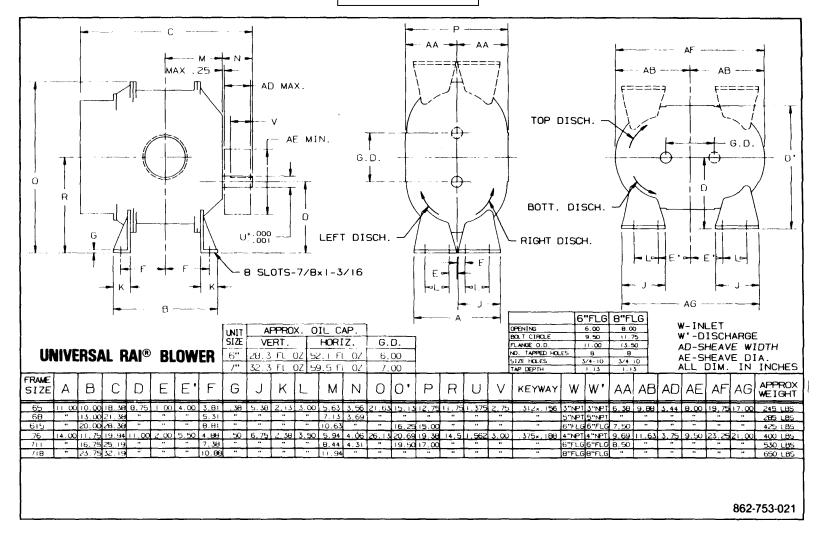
Dimensional Assembly of UNIVERSAL RAI® Blower (6" & 7")
